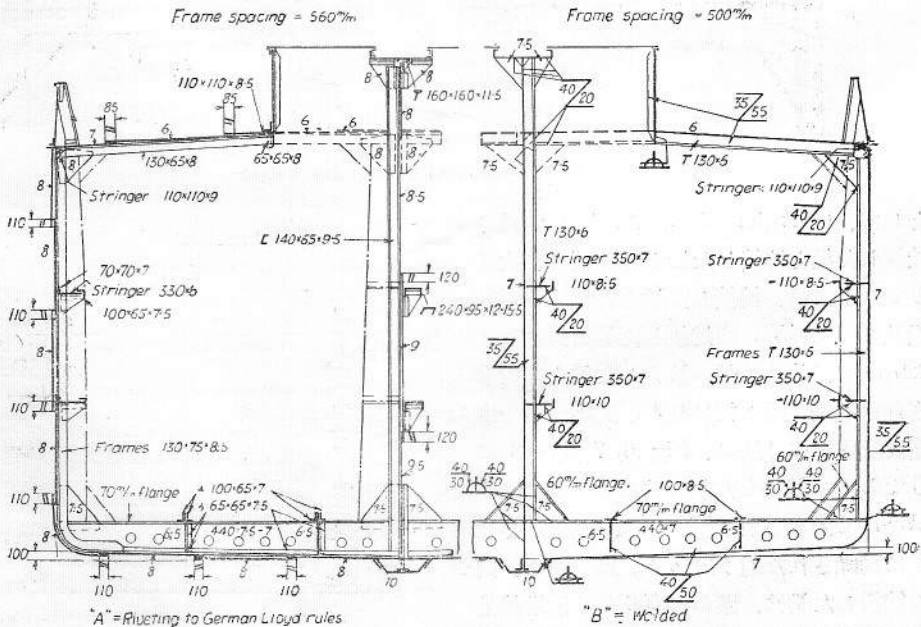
Midship Section, Riveted and Welded.
